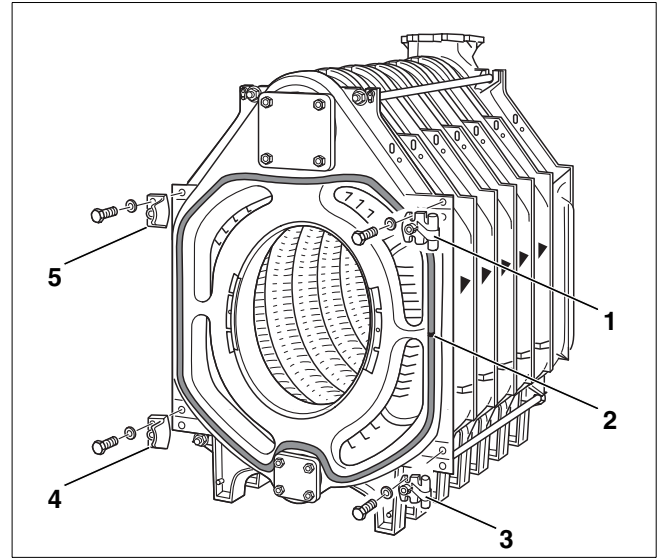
Assembly – Fitting hinge knuckles and strikers
